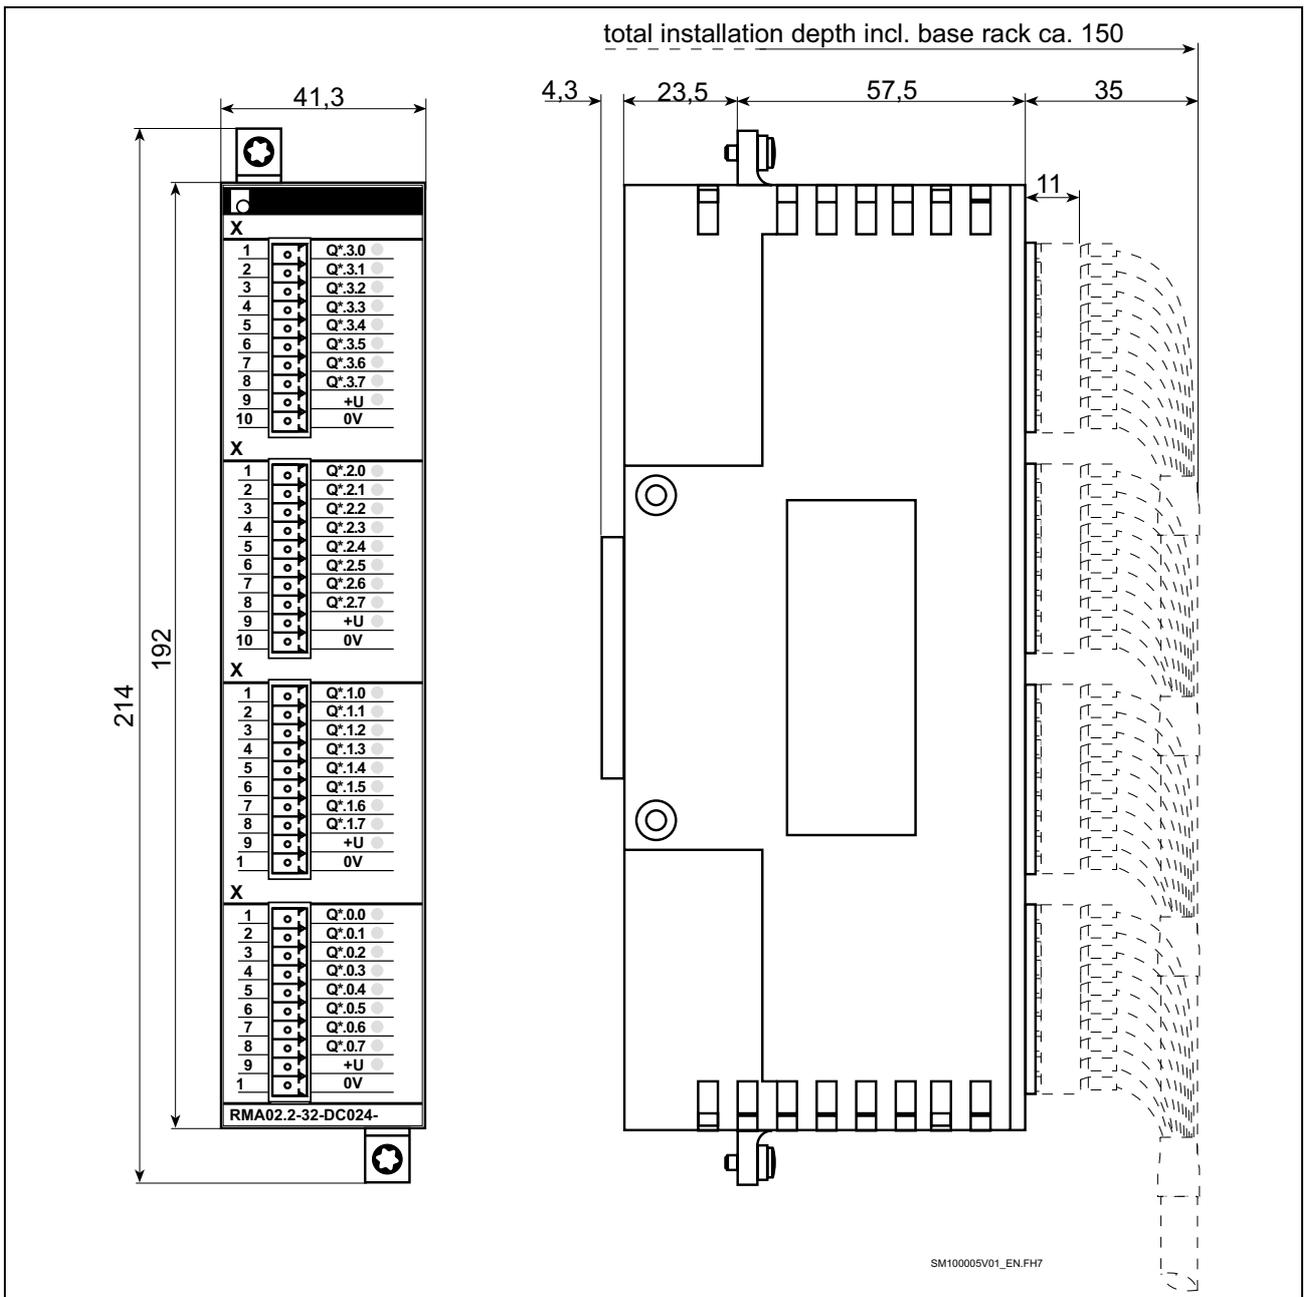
Dimensional sheet RMA02.2-32-DC024-050
